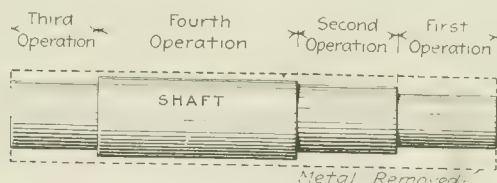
SECTION THROUGH A SHAFT ON WHICH FOUR OPERATIONS ARE TO BE PERFORMED IN A LATHE (SEE FIG. 2)
